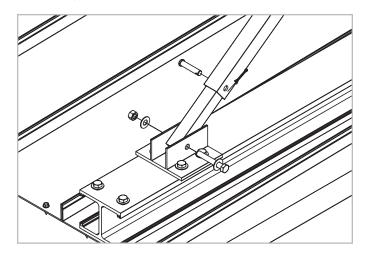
Drill 3/8" hole in the tie-back tube when the top and bottom tubes are bolted and canopy is level.
